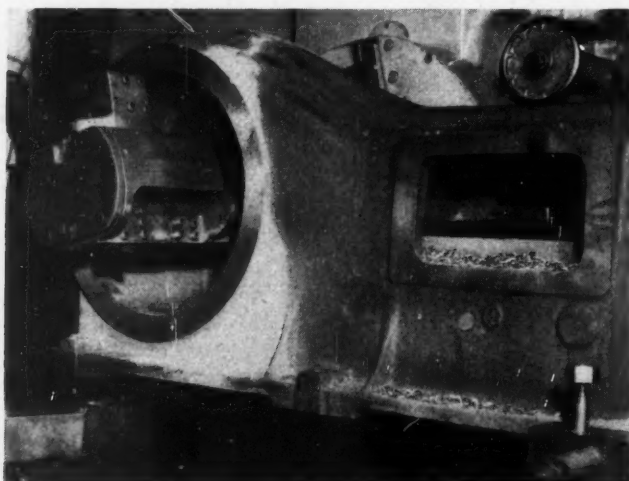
Left Center — Facing and boring crankshaft bores in pump housings with a continuous feed boring head
